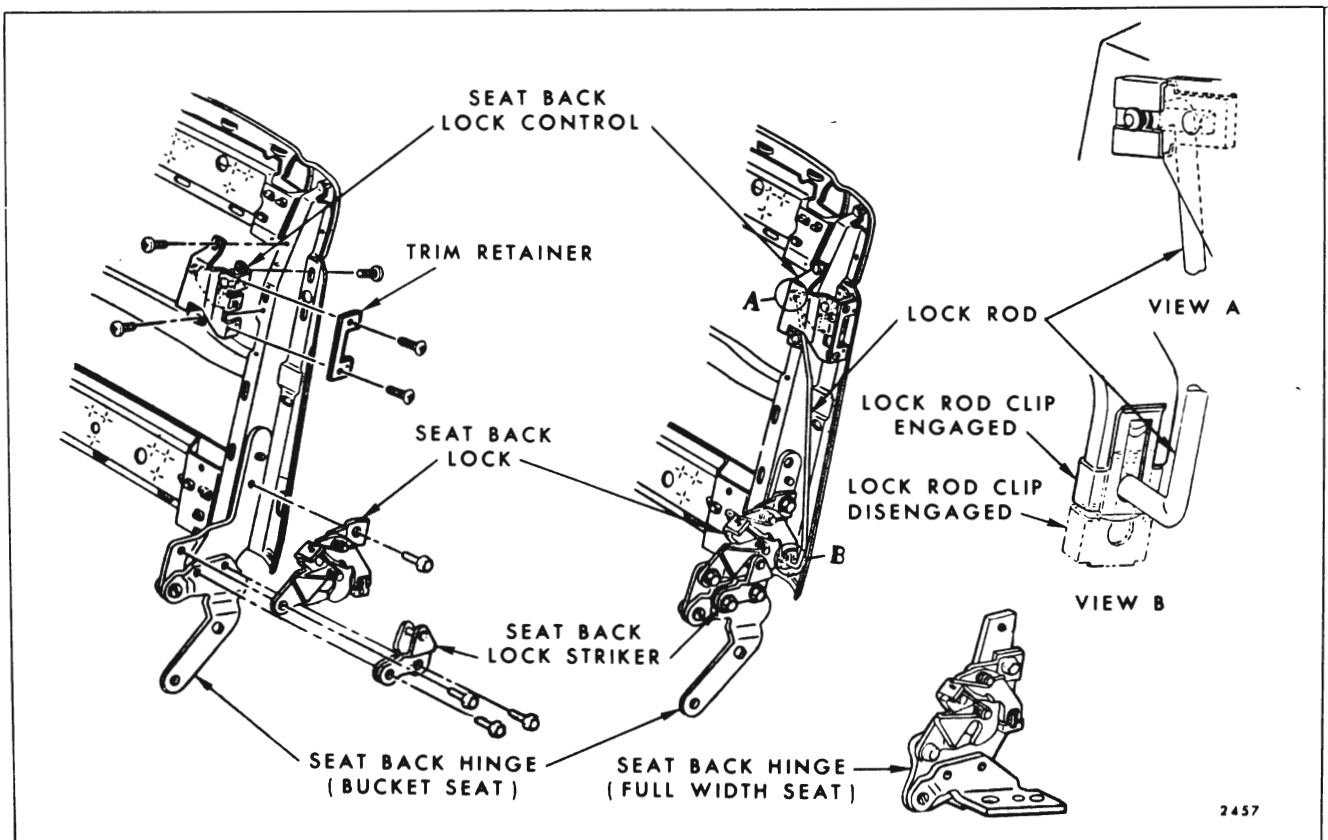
Seat Back Lock, Lock Control and Lock Rod - Strato Full Width and Bucket Seats
